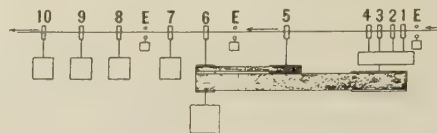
10-IN. STRIP MILL OF LACLEDE STEEL COMPANY ILLUSTRATING THE USE OF A MULTI-STAND ROUGHING MILL IN TANDEM WITH INDIVIDUAL MOTOR DRIVEN FINISHING STANDS
